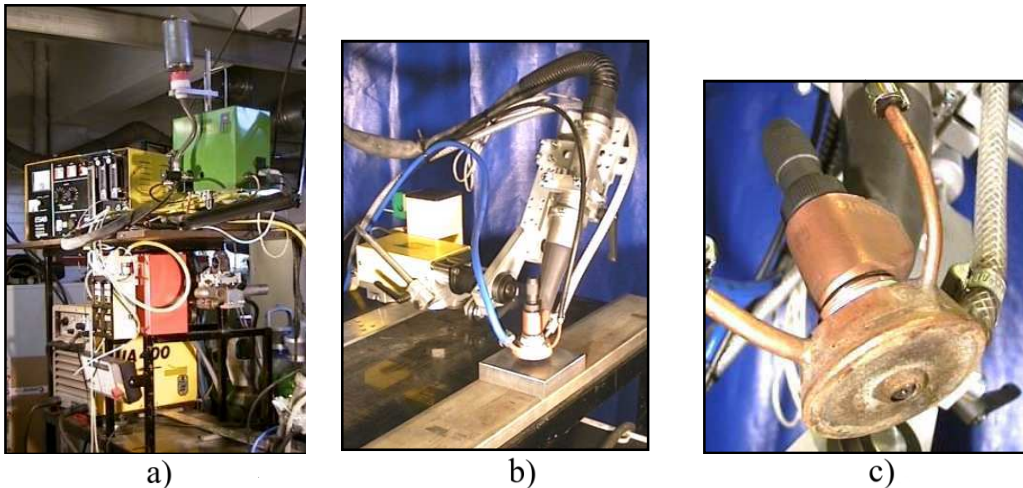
The mechanized PTA welding unit: a) an overview, b) the conveyor, the plasma torch, and the work piece, and c) the plasma torch, the prototype external gas shielding torch, and the pipes for cooling liquid and shielding gas
